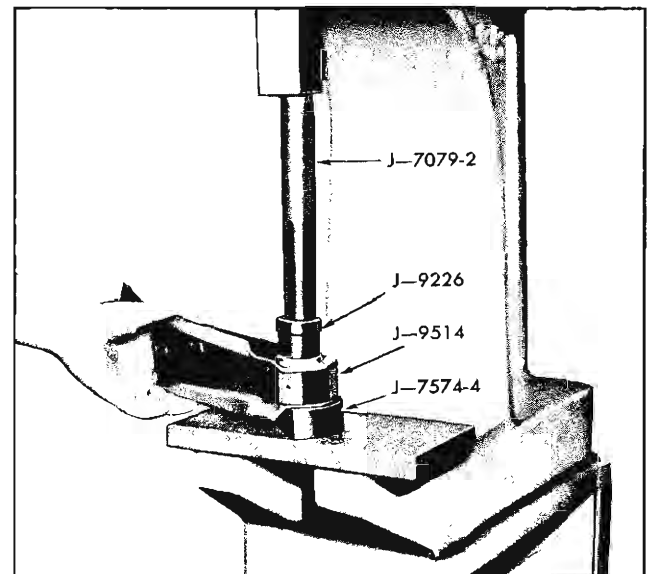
Removing Lower Control Arm Pivot Bushing—Chevy II
